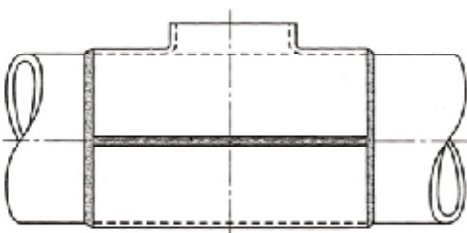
Fillet welding of pipe sleeve ends
